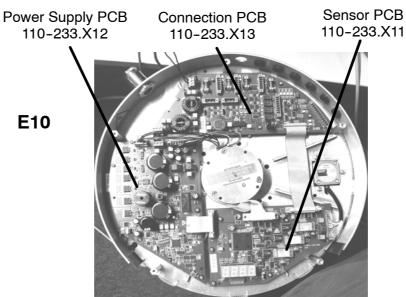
Arrangement of PCB's in the STD 22 Compact Compass (cover removed)
